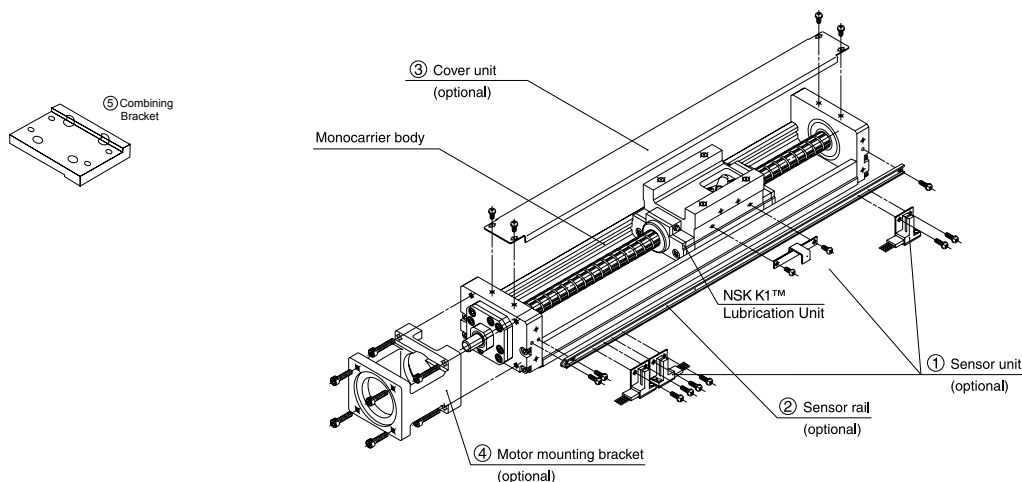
Assembly – Optional Components for MCM10 (example)
